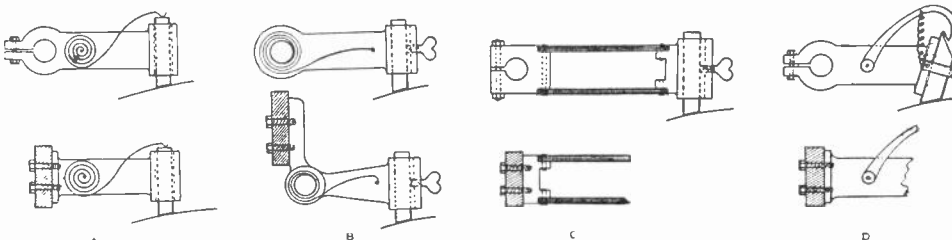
The sketches on the left show several common types of brush holders. At "A" are two views of box-type holders. "B" and "C" are known as clamp-type holders; while "D" is a brush holder of the reaction-type.
